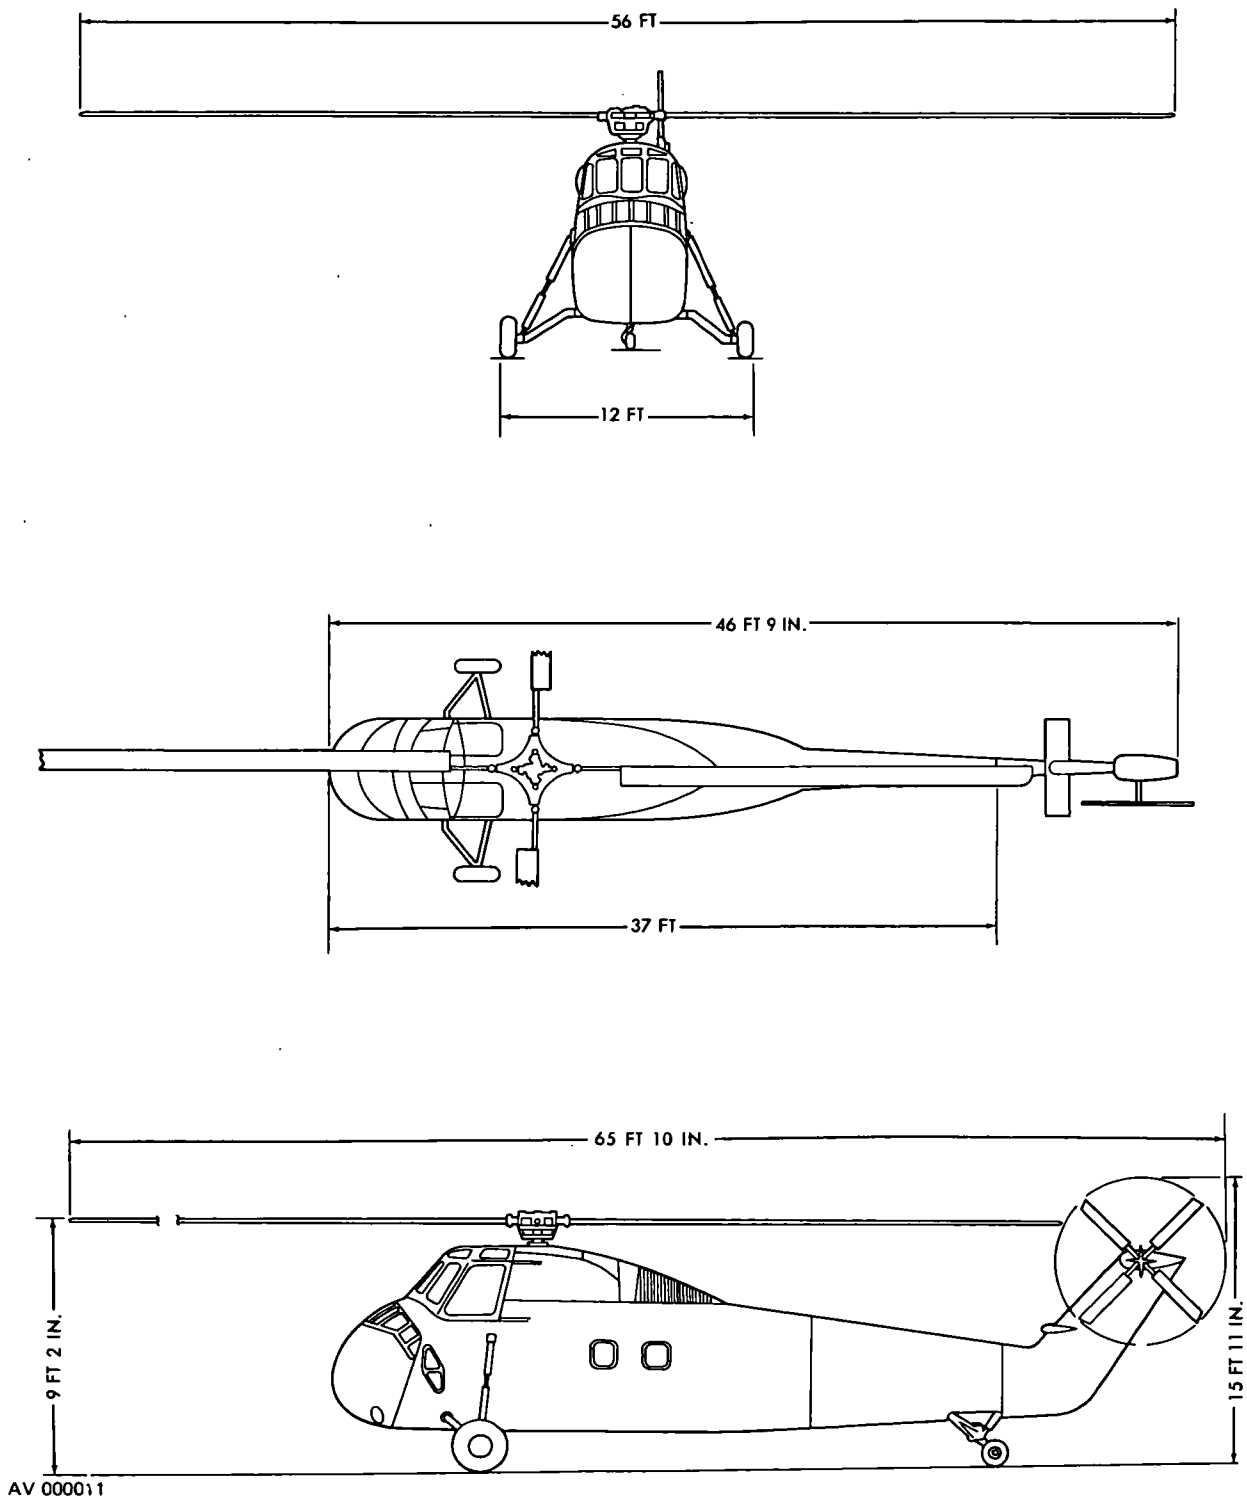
Principal dimensions, CH-34C (Choctaw)
